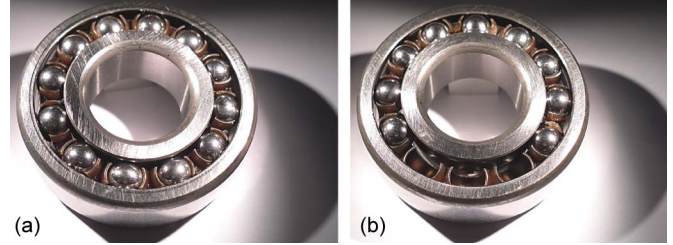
Photographs of the bearings used in the experiments. (a) Healthy bearing. (b) Bearing with spheres removed.
